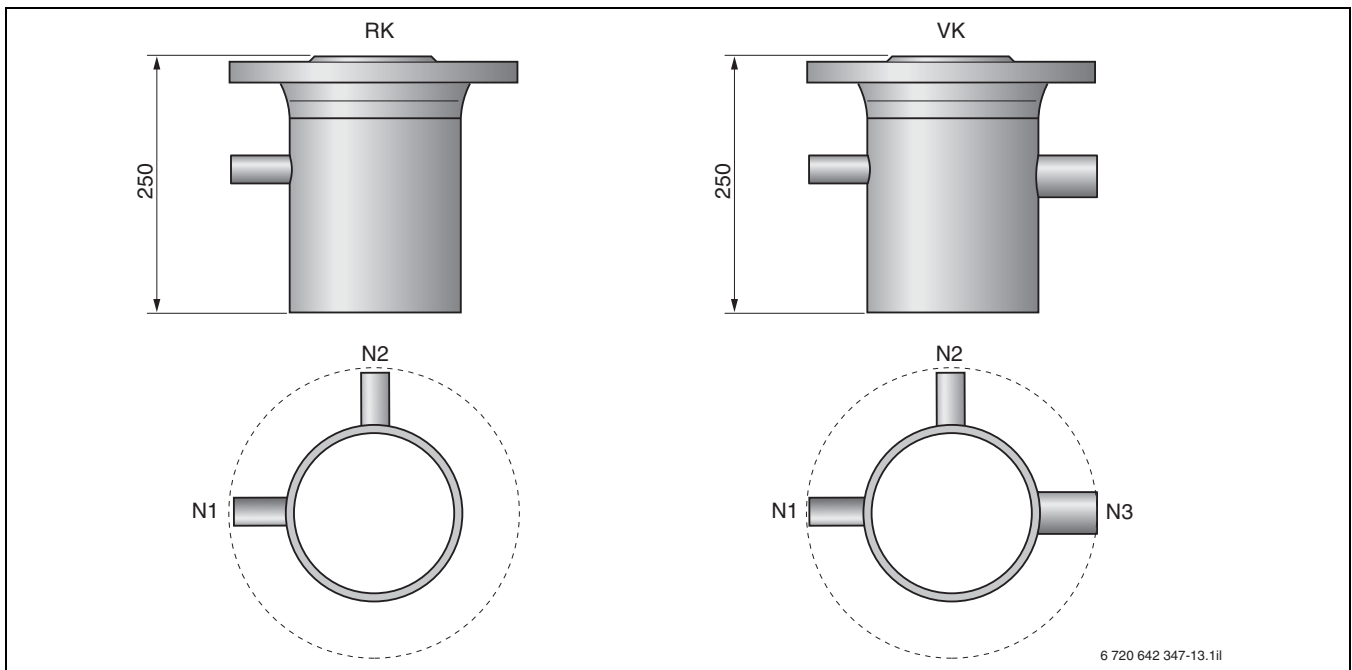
Connectors for UNIMAT UT-L boilers with test points for safety equipment (dimensions in mm; internal diameters → Tab. 15, page 22, Tab. 38, page 75 and Tab. 39, page 78)
